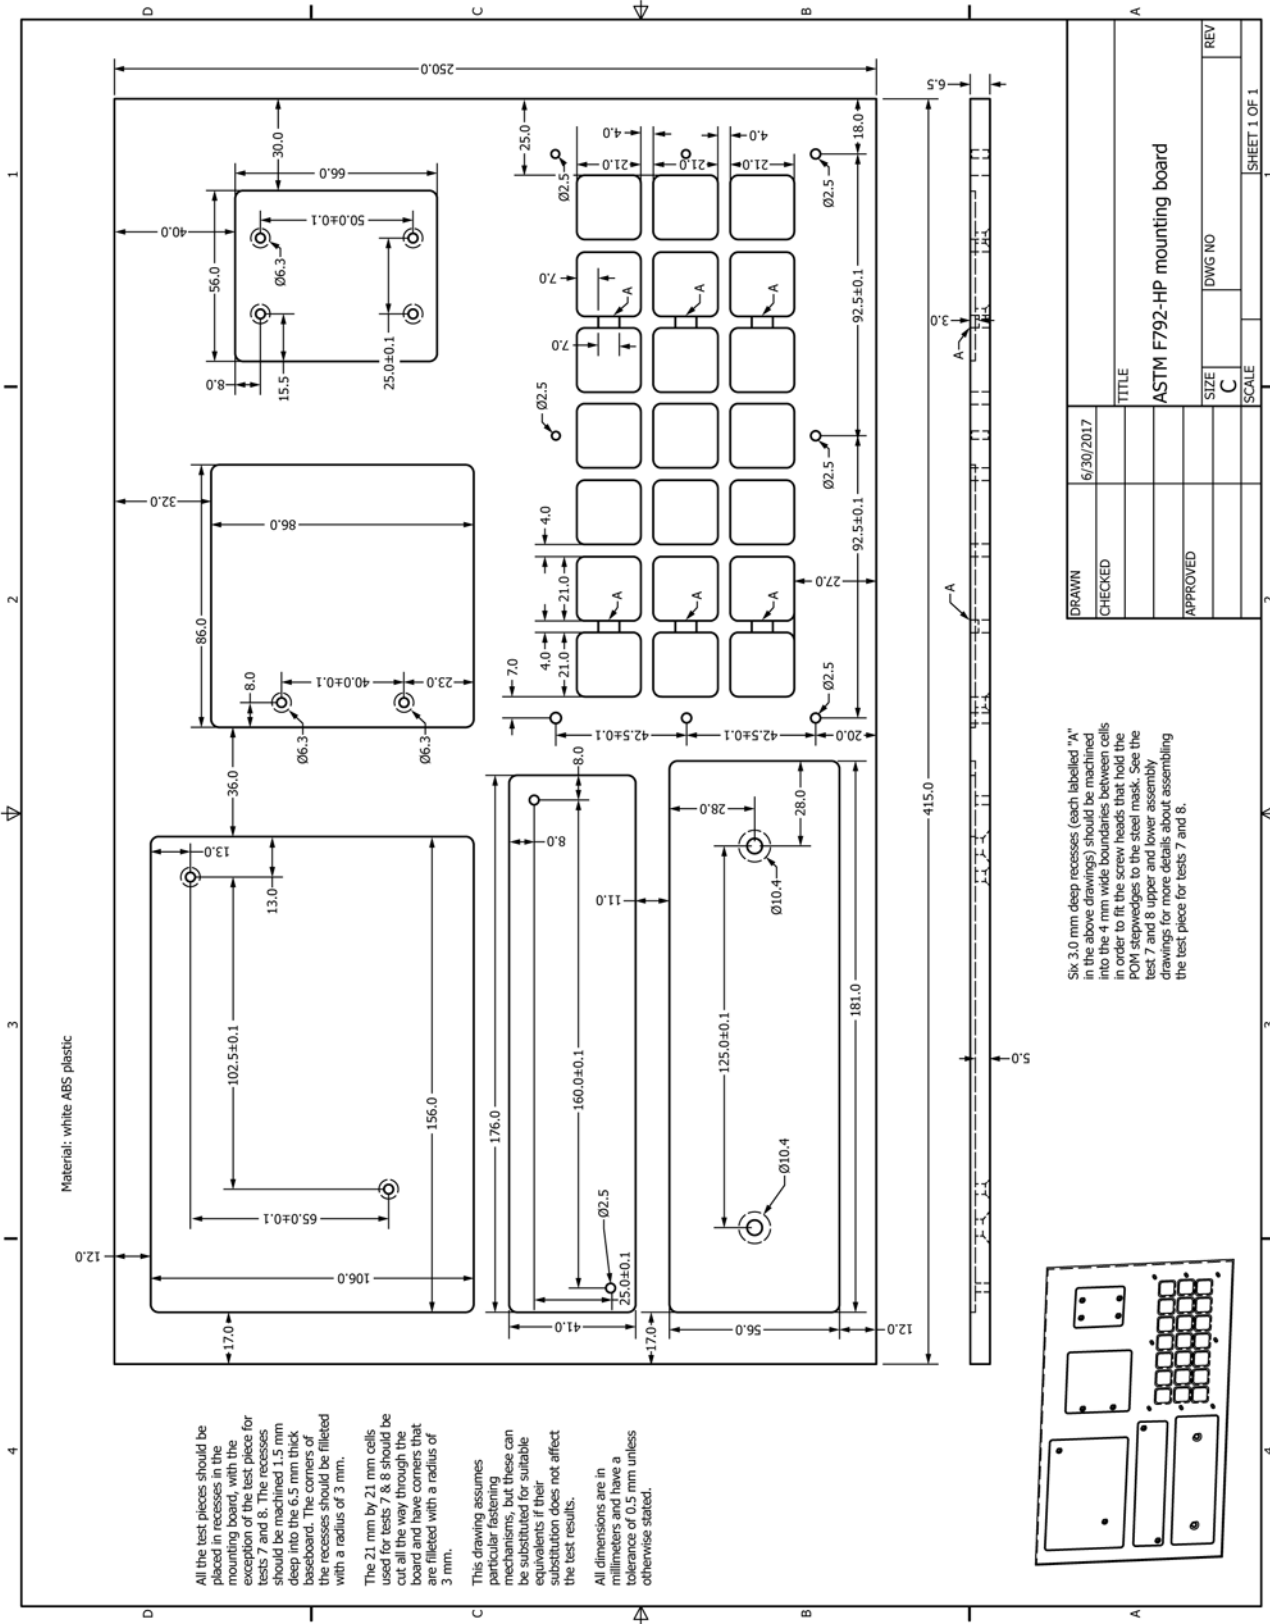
Practice F792 – HP Mechanical Drawing
